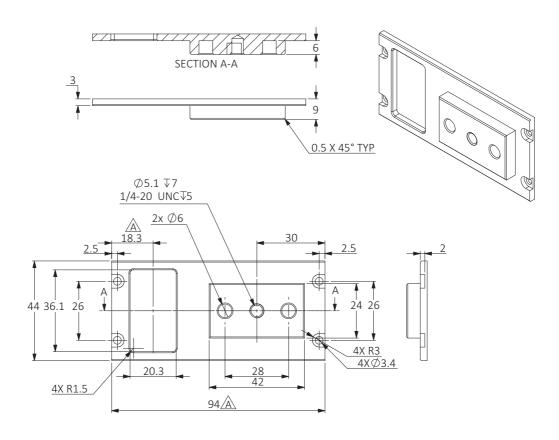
Prosilica GX6600 tripod adapter mechanical drawing
